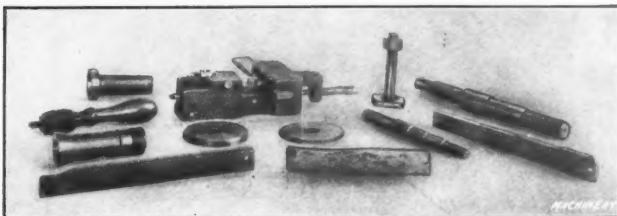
Taper Turning Tool and Templates used in machining Different Classes of Work
